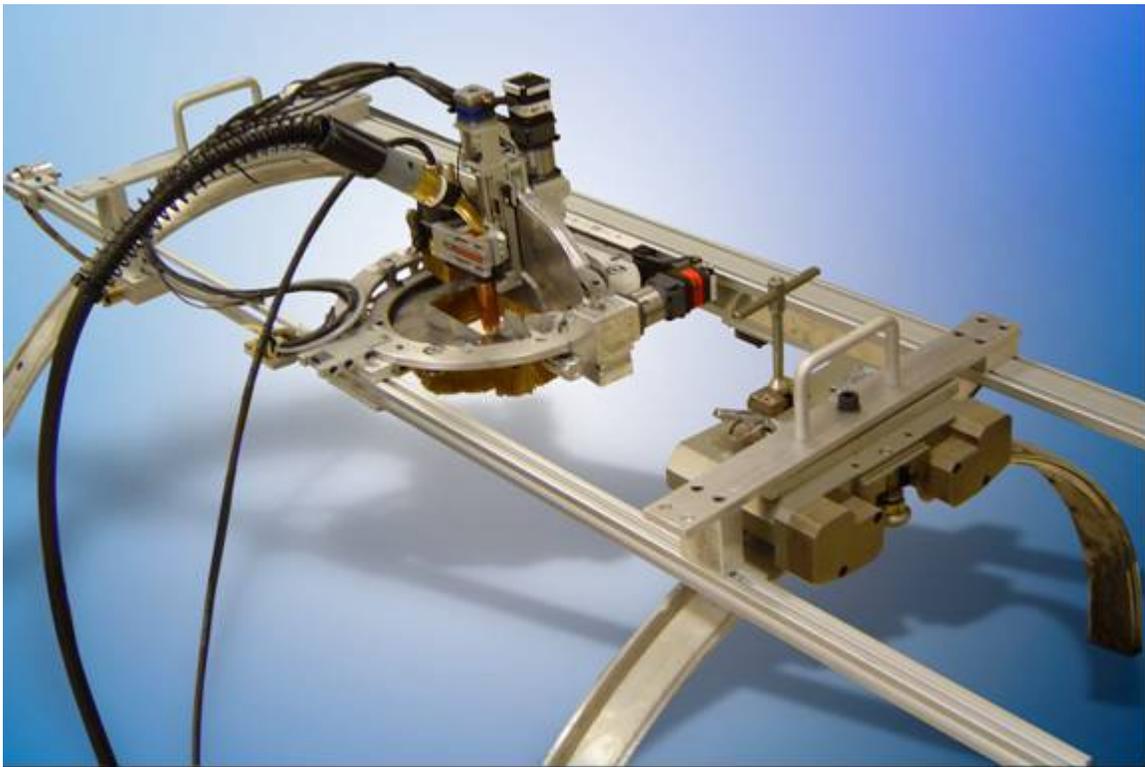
Alternative System Design with Serimer DASA Welding Bugs
